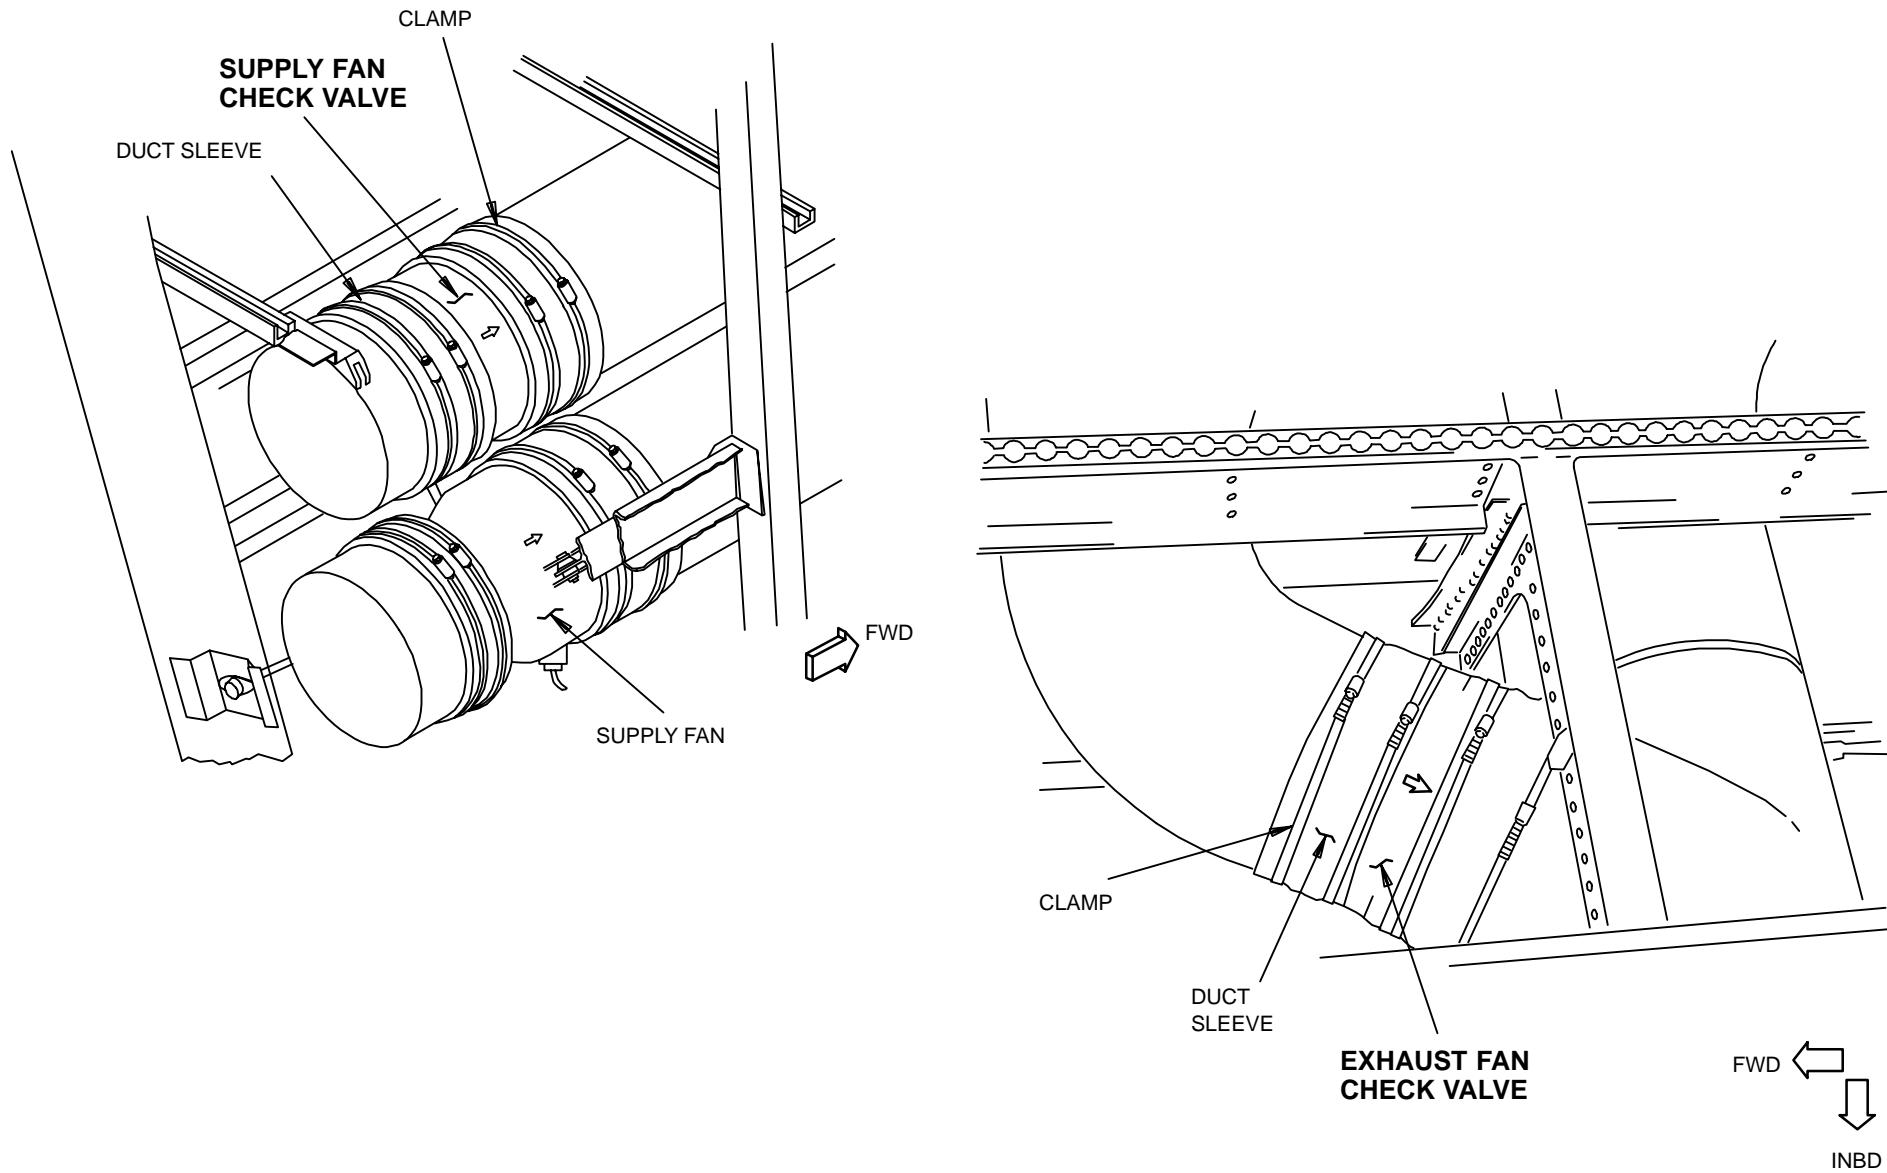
SUPPLY- AND EXHAUST FAN CHECK VALVES
